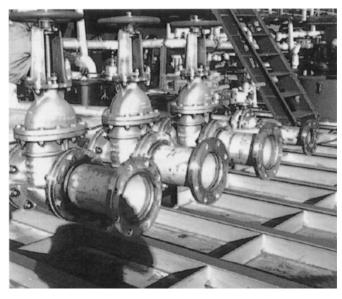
An application of DW-316L for fillet welding of the pipefitting of a chemical tanker.
